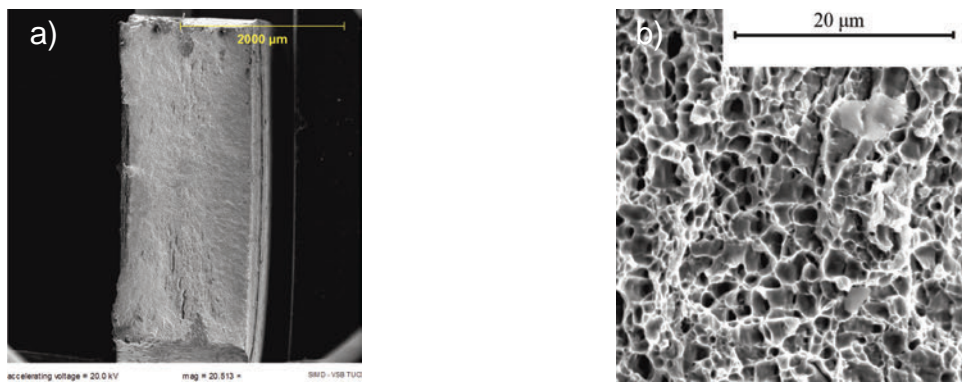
Fracture area of Ck55 steel after tensile test: after the 3rd pass – longitudinal sample, macrograph (a); detail (b)
